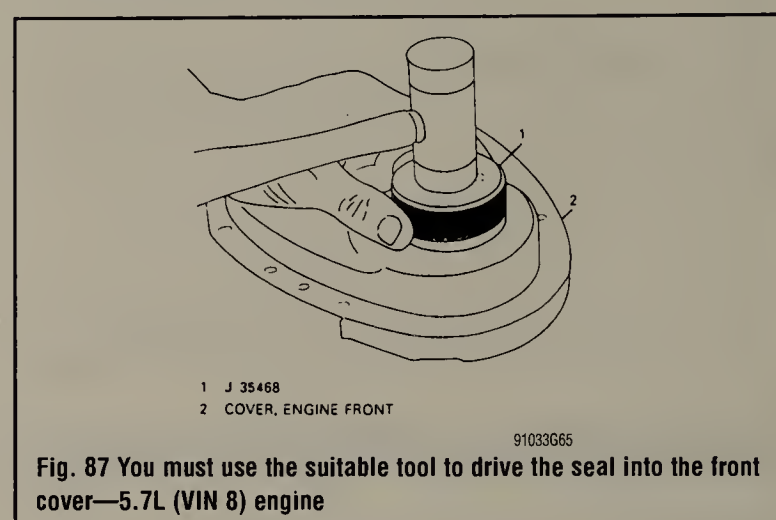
You must use the suitable tool to drive the seal into the front cover—5.7L (VIN 8) engine
